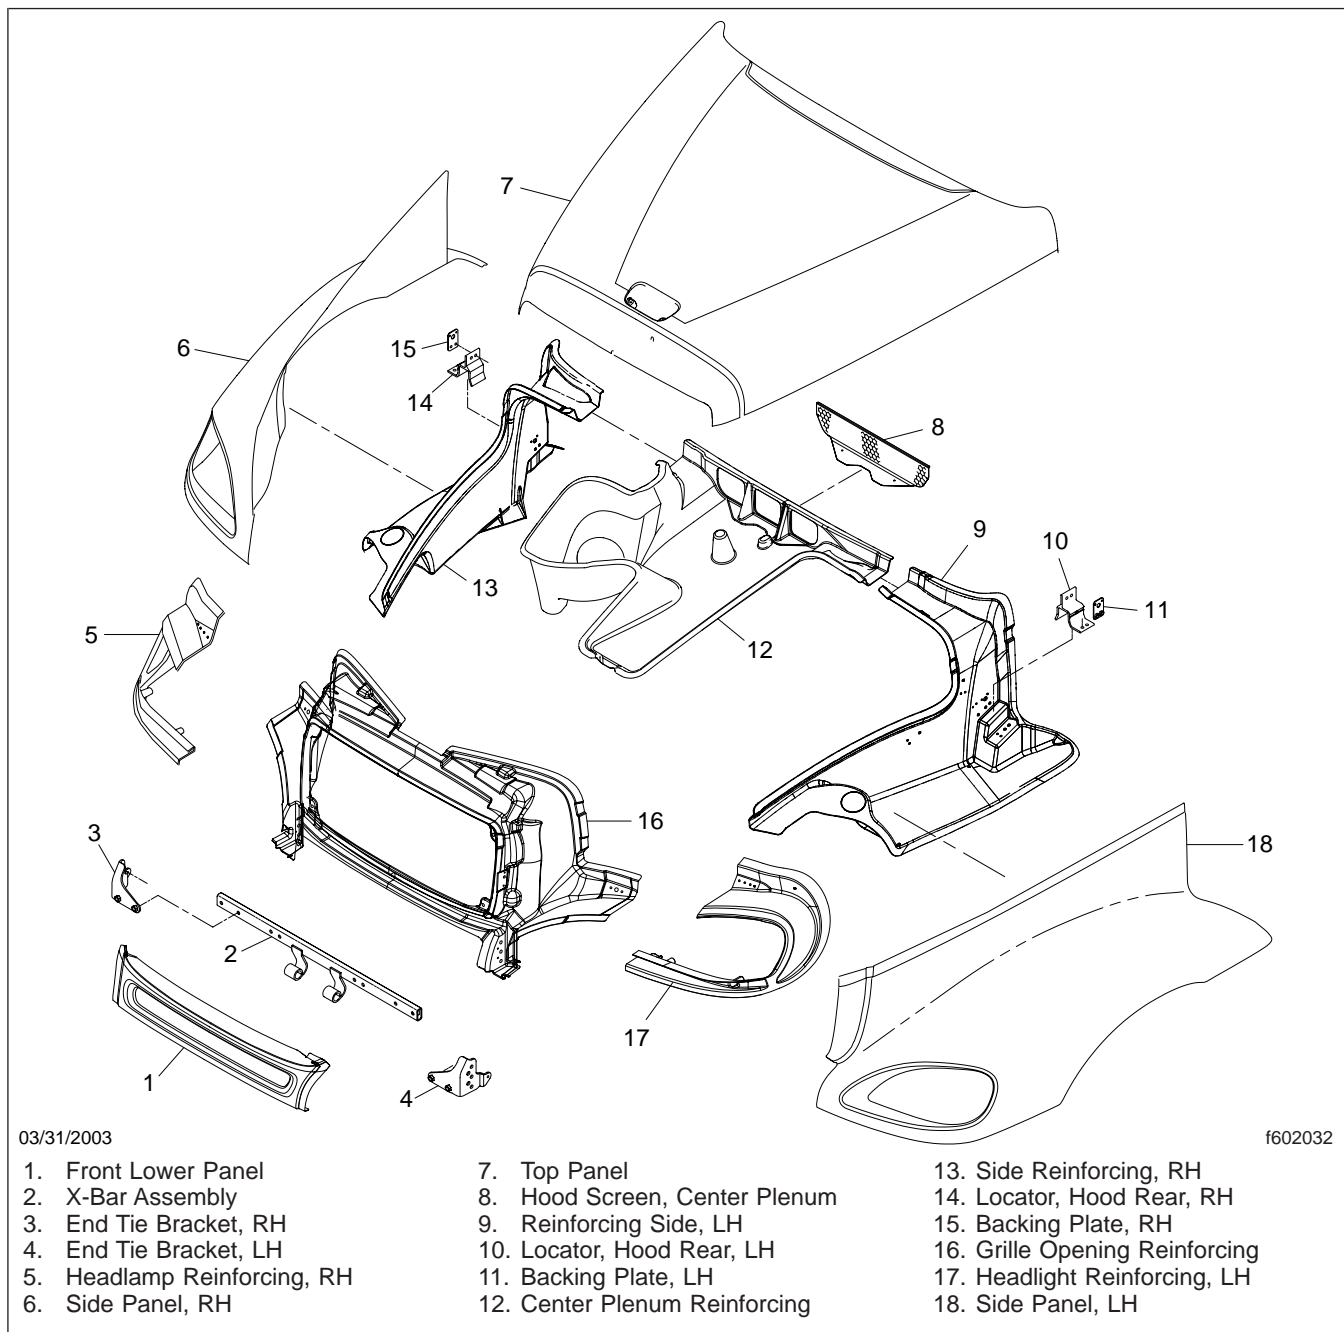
, Columbia 120 (SMC) Hood Assembly Components
